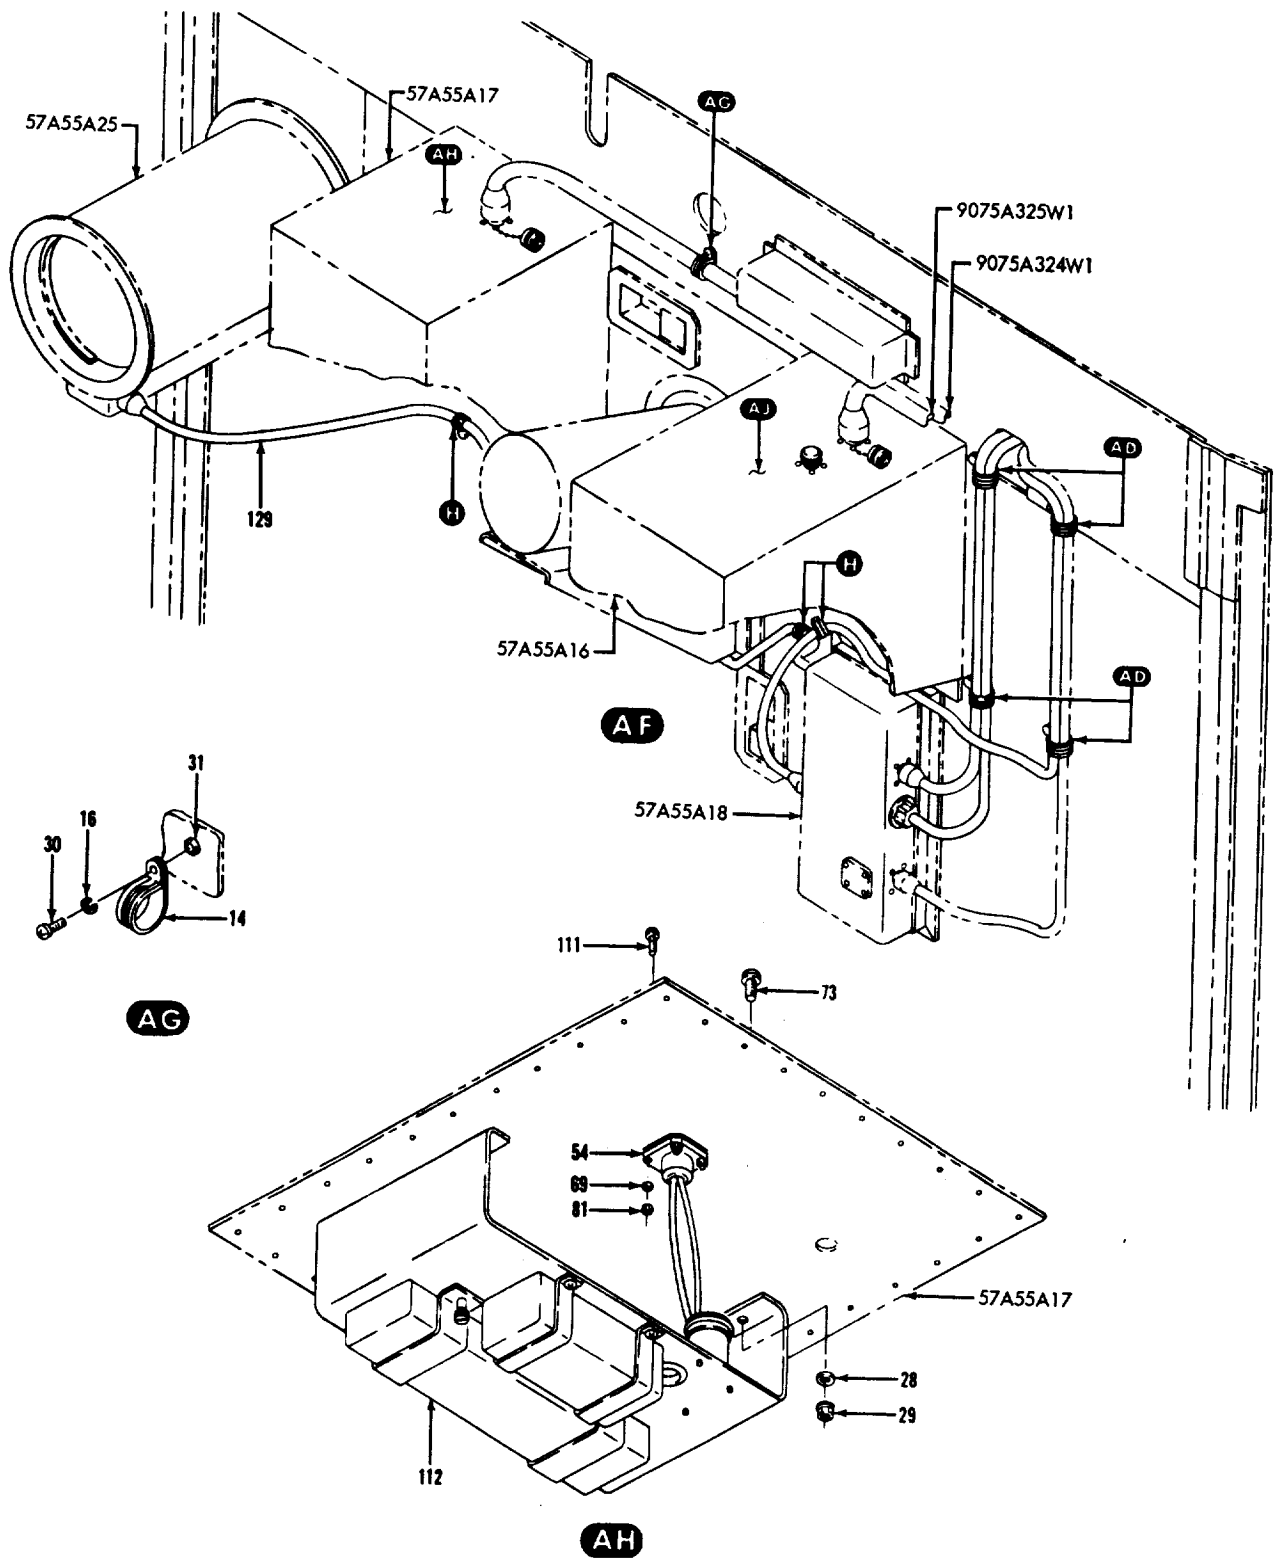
Electrical Equipment Installation (Sheet 11 of 19)
